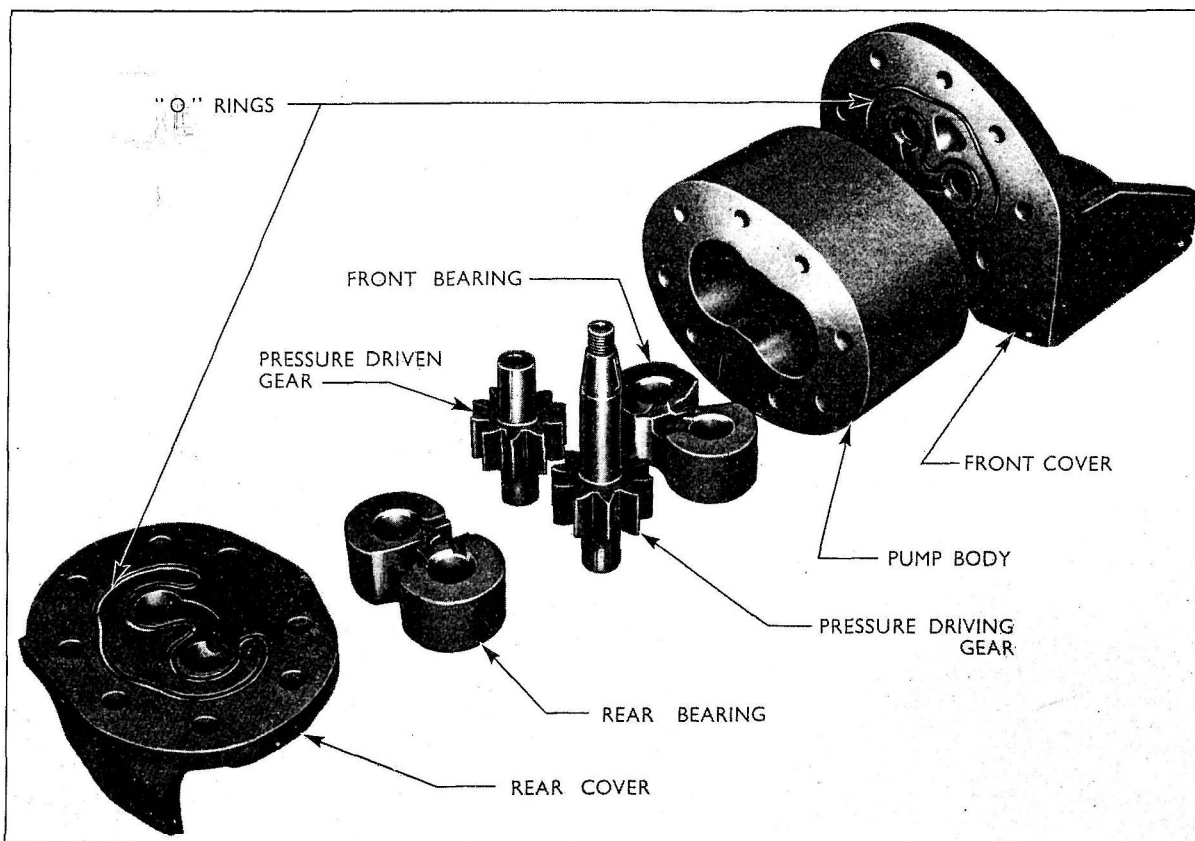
Hydraulic Pump Body, Gears and Bearings
